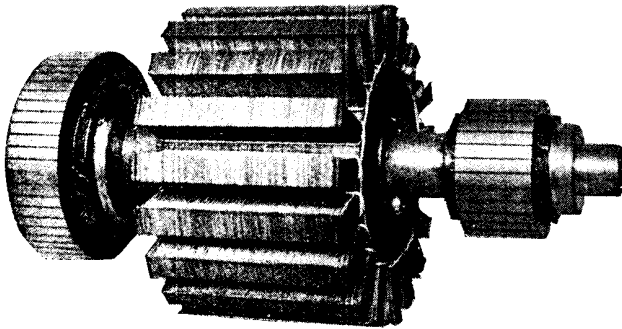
Winding begins on the outer edge of the rotor and finishes on the inside
